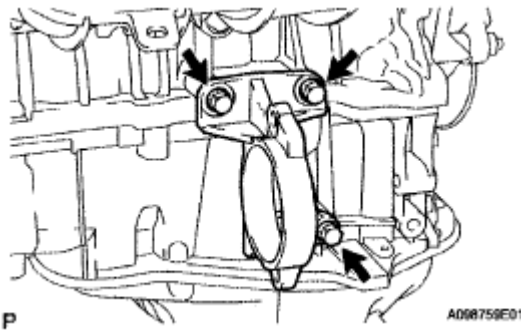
Locating Drive Shaft Bearing Bracket And Bolts
